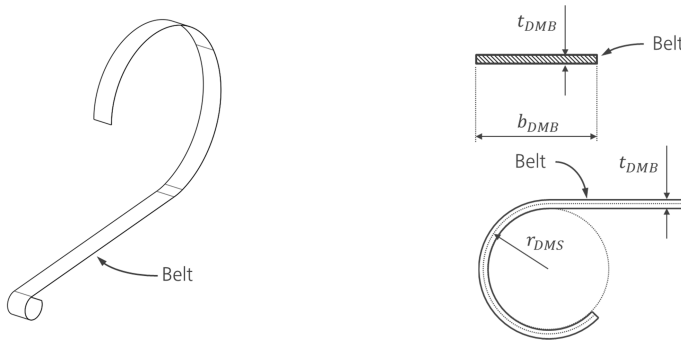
Flexible belt in its form integrated into the Deployment Mechanism (left), cross-sectional dimensions (top right) and reeling process on the Belt Spool (bottom right).
